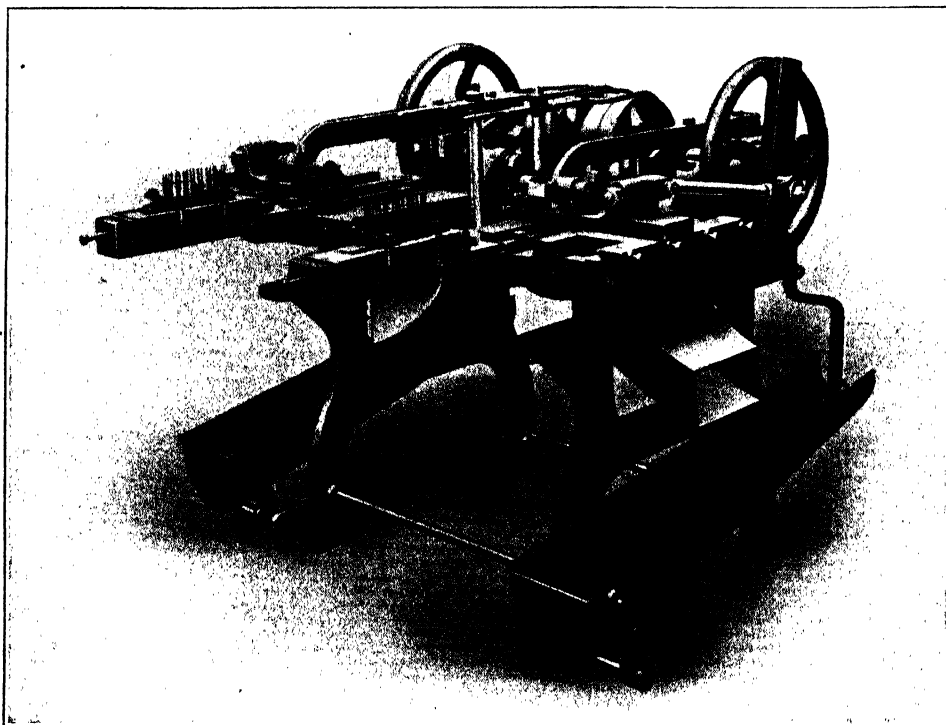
HIGH-SPEED STRAIGHTENING AND CUTTING-OFF MACHINE—E. WHITE.
